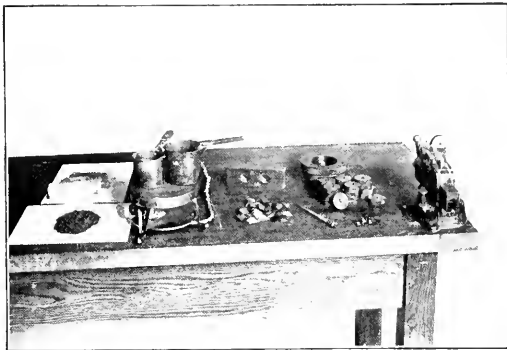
CAST OF THREAD AND OUTFIT REQUIRED FOR MAKING IT
